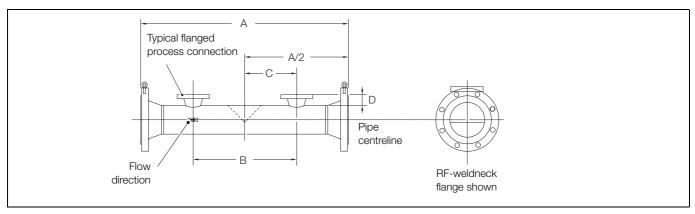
Model WMF with RFWN end flanges - sizes 100 to 600 mm (4 to 24 in.)
